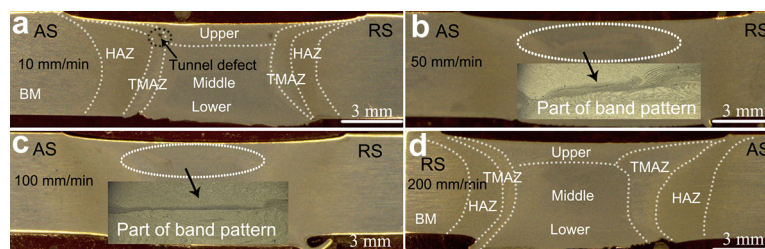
Cross-sections of SSFSW joints welded for different welding speeds: (a) 10 mm/min, (b) 50 mm/min, (c) 100 mm/min, (d) 200 mm/min.
